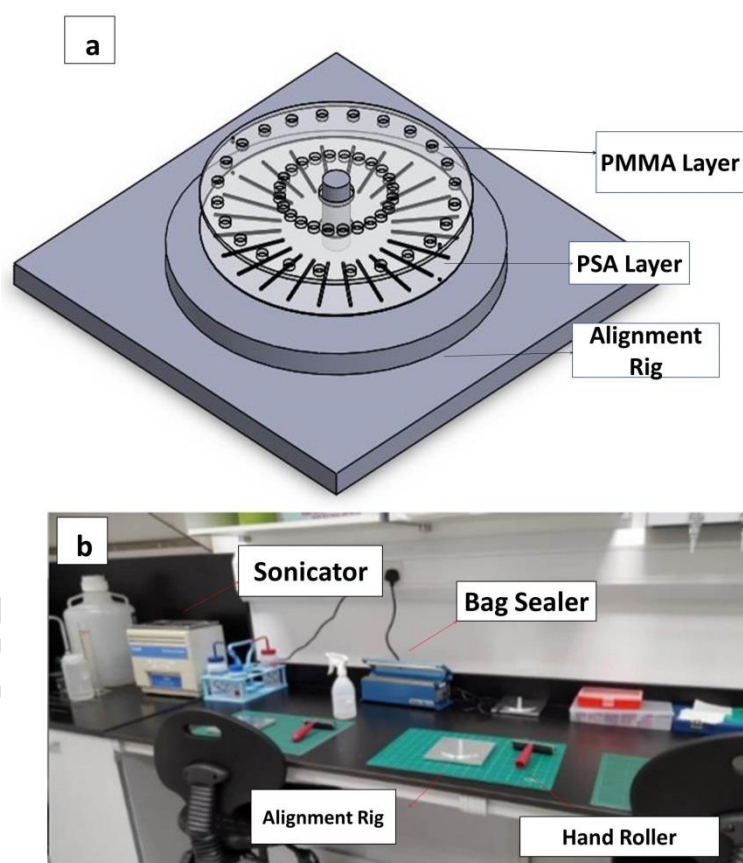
Equipment used for assembly in clean room. a) Schematic of the assembly rig with PMMA and PSA layers. b) Assembly room set up for disc preparation and assembly.
